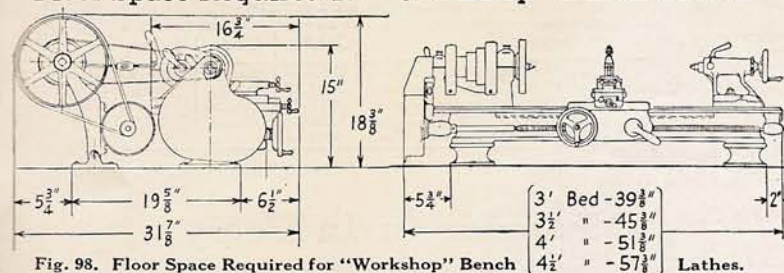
Floor Space Required for "Workshop" Bench Lathes.
